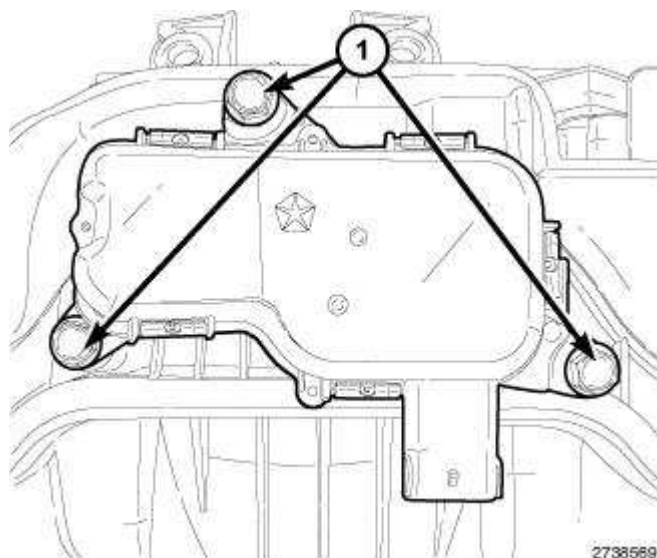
Short Runner Valve Actuator Retaining Bolts
